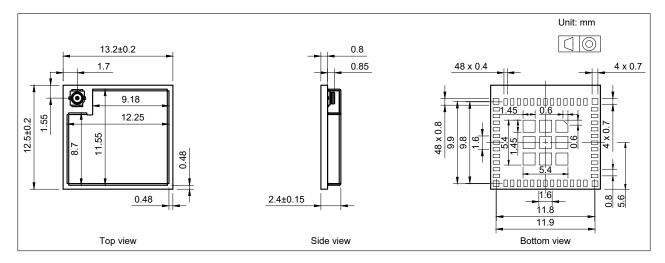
ESP32-H2-MINI-1U Physical Dimensions
